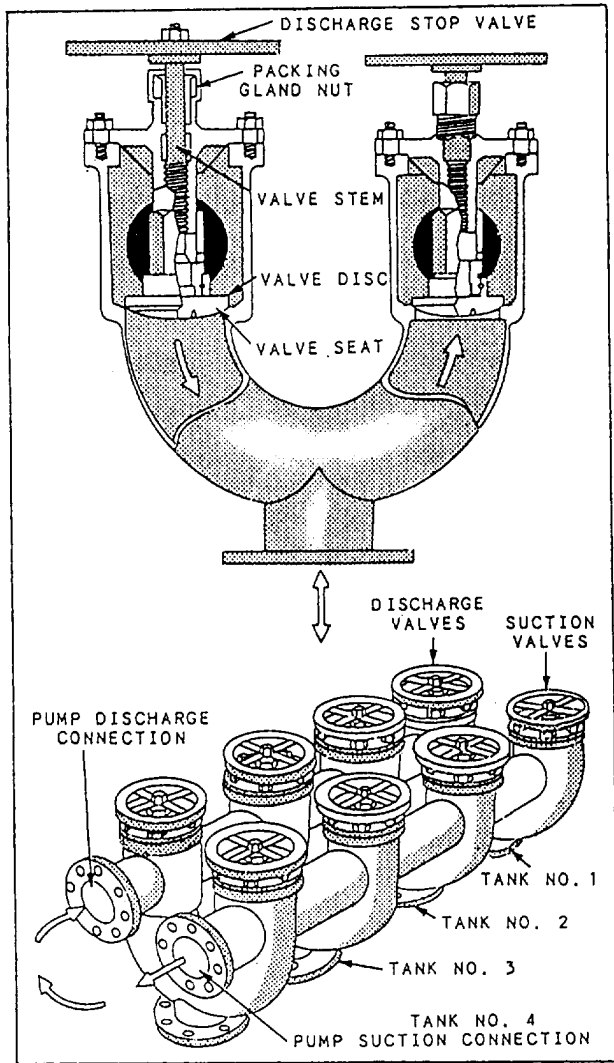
Valve manifold showing cutaway view of the valves and typical combination of suction and discharge valves.
